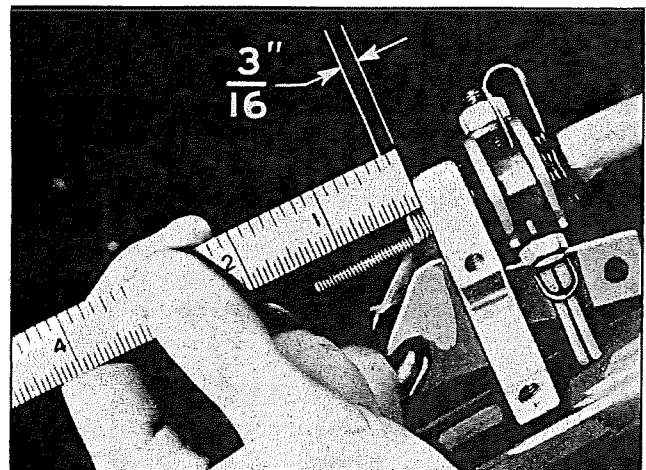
Chevrolet 1939. Assembling Lower Bracket
